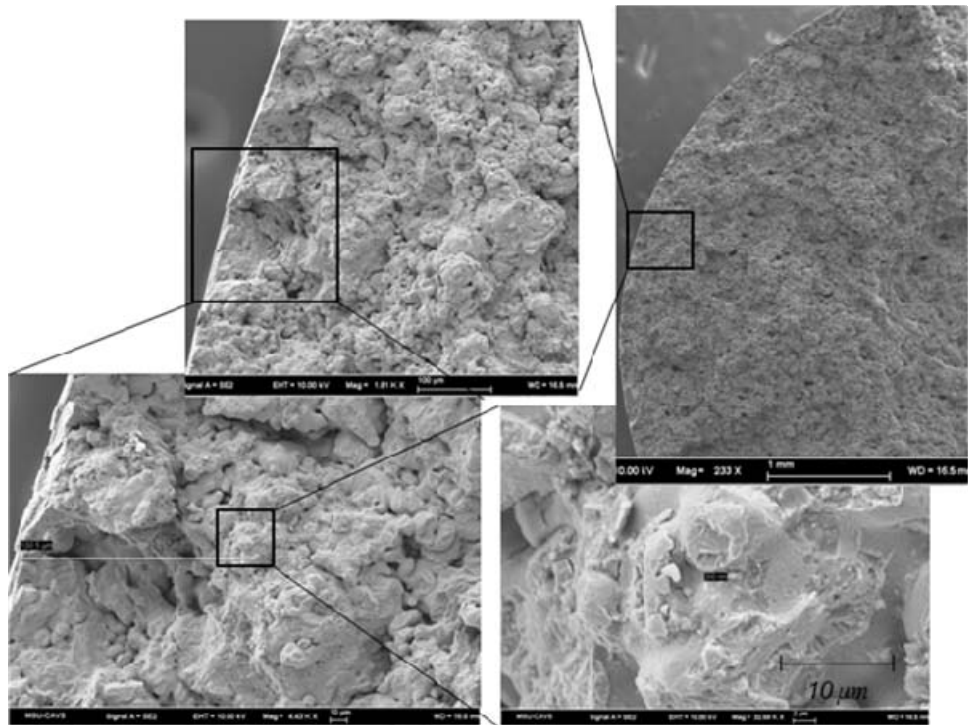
Fracture surfaces of fatigue Specimen B.
